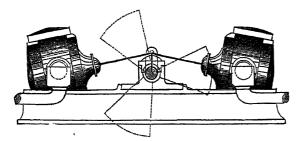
Oscillating-Cylinder Screw-engine, Direct.
